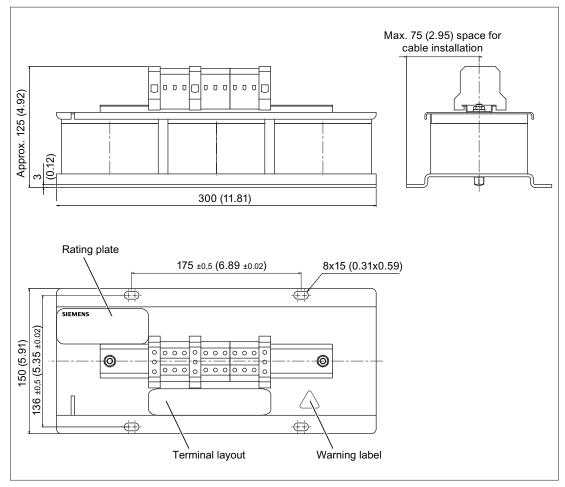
Dimension drawing of HFD line reactor 16 kW, all dimensions in mm and (inches)
